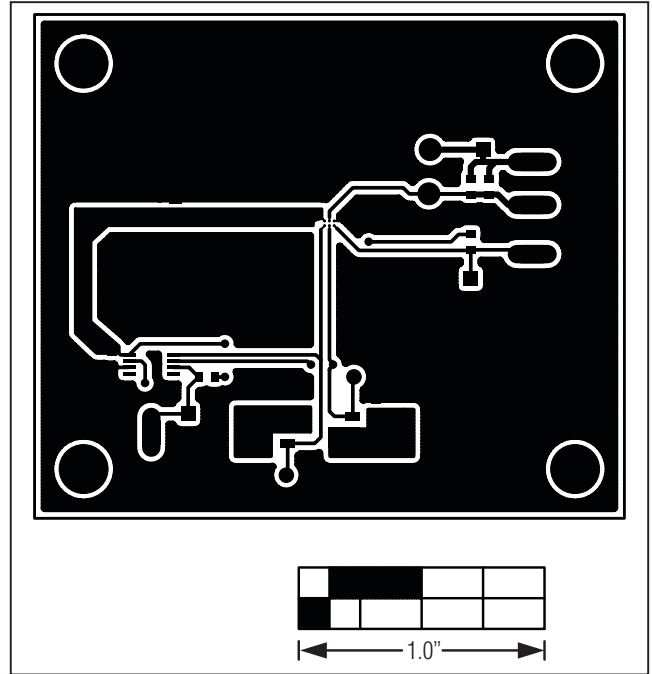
MAX9934T EV Kit PCB Layout—Component Side
